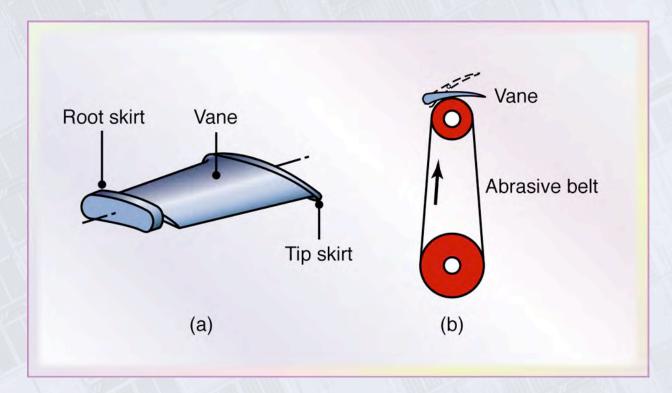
Belt grinding of turbine nozzle vanes.
